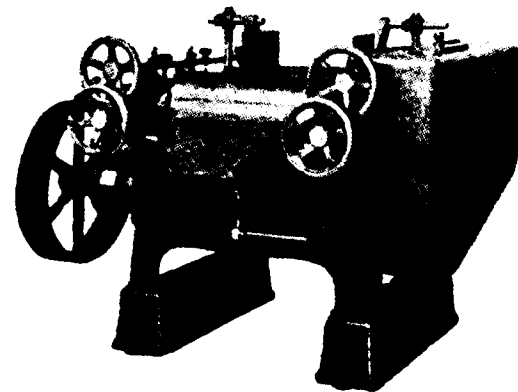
The Brinjes & Goodwin 24 in. by 12 in. Box-frame type triple roll mill.
